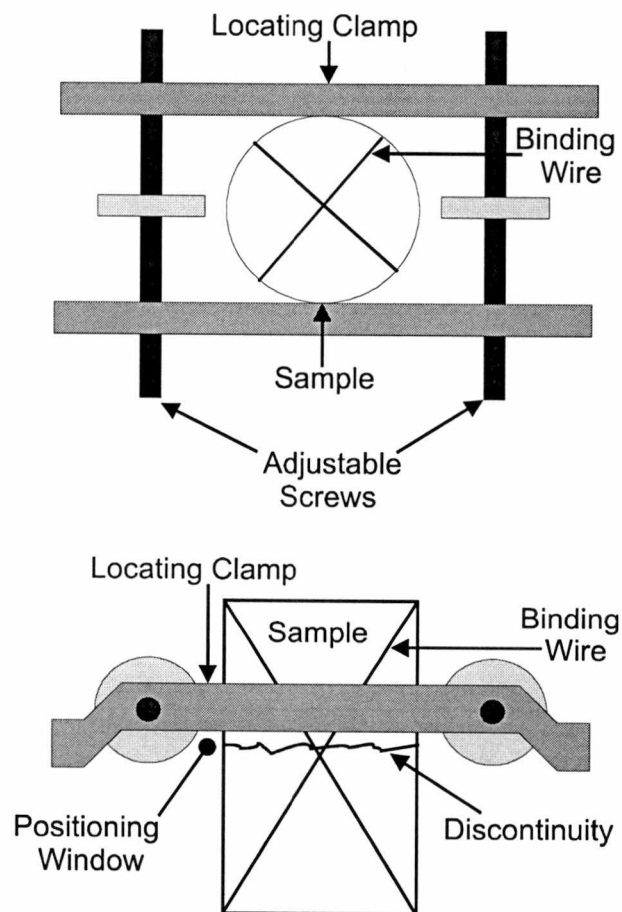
A sample with the joint aligned correctly in the locating clamp.
